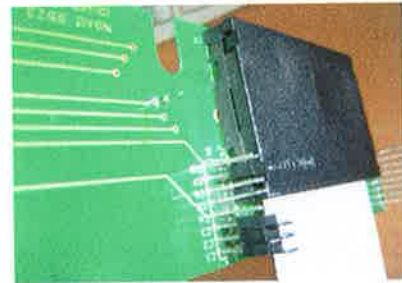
Close up of PCB, card support, pins and jumpers.
